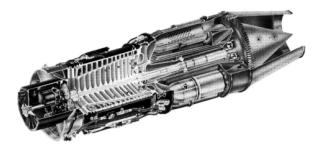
GE J47 single-rotor turbojet engine (courtesy of GE).
